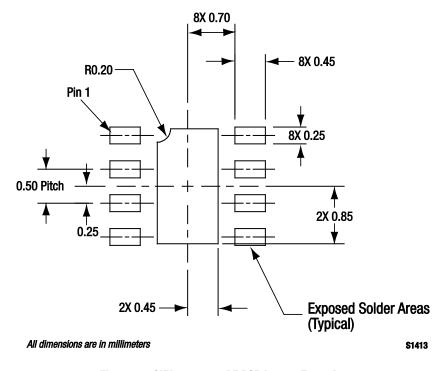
SKY67002-396LF PCB Layout Footprint (Top View)
